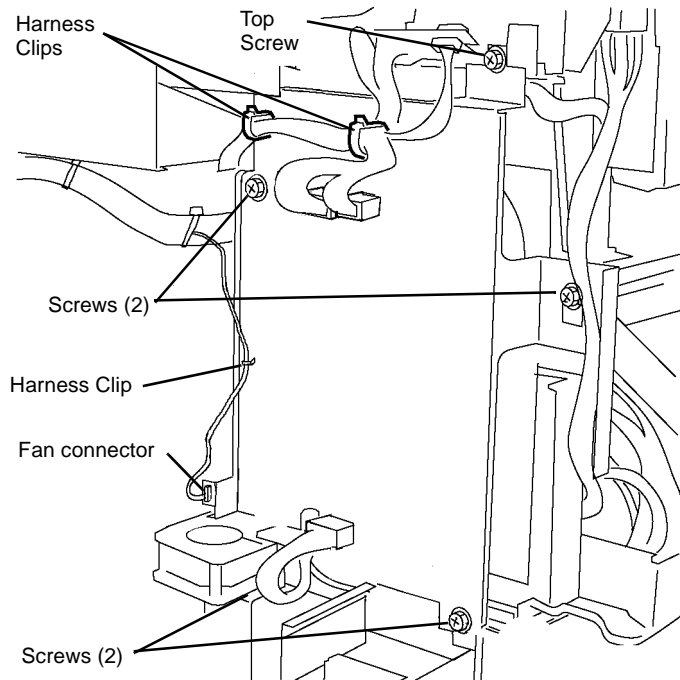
Removing 24 VDC LVPS Chassis Assembly
